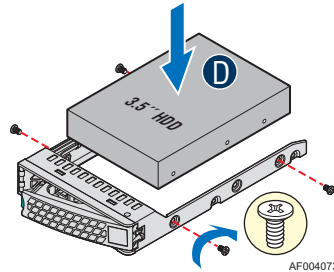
3.5" HDD Assembly – Installing the Hard Disk Drive
